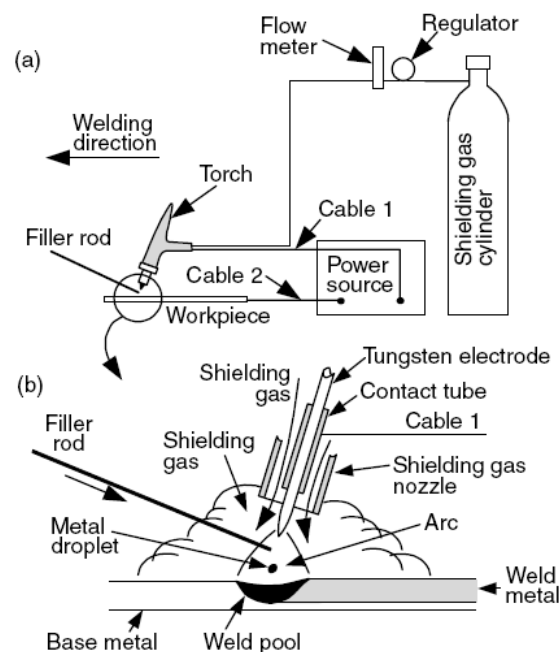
Gas Tungsten Arc Welding process: a) Entire scheme of the welding process. b) Closer view inside the welding area. [21]
